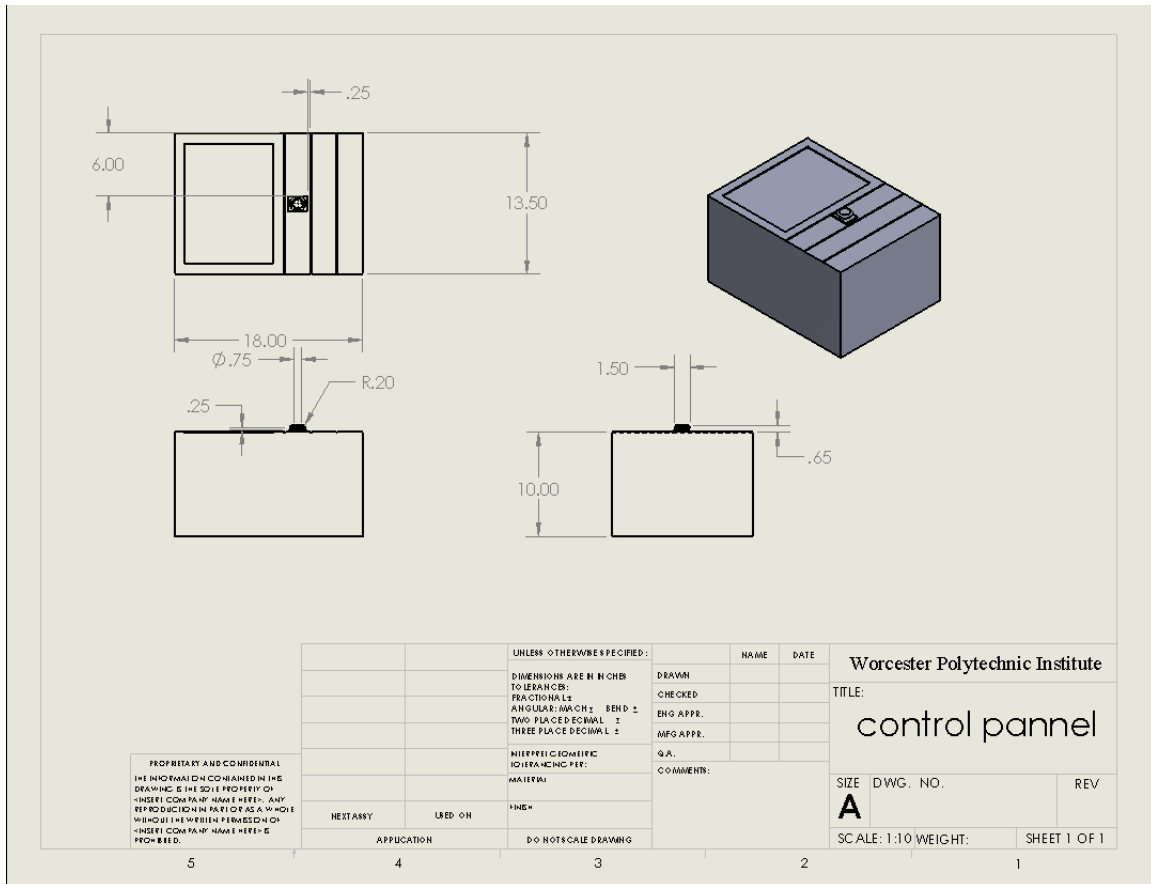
CAD drawing of the location of the transmitter button on the control panel
